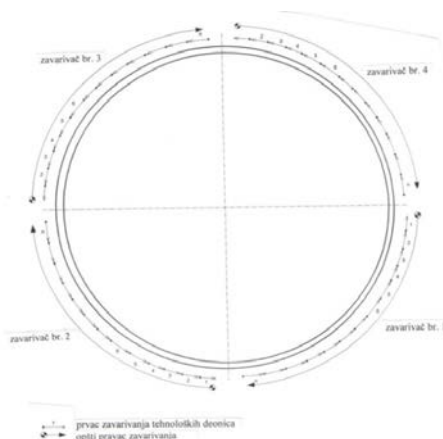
Welding joints of the shell between segments with a step back technique
